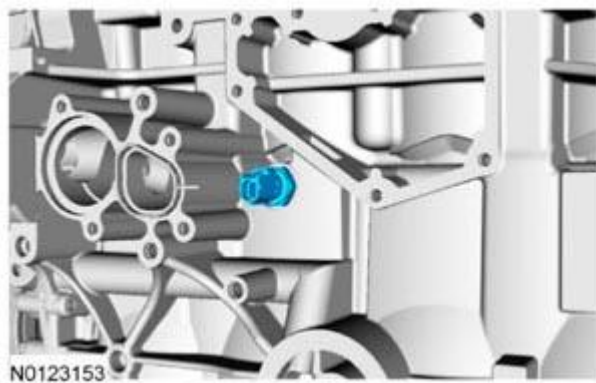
Identifying Engine Oil Pressure (EOP) Switch
